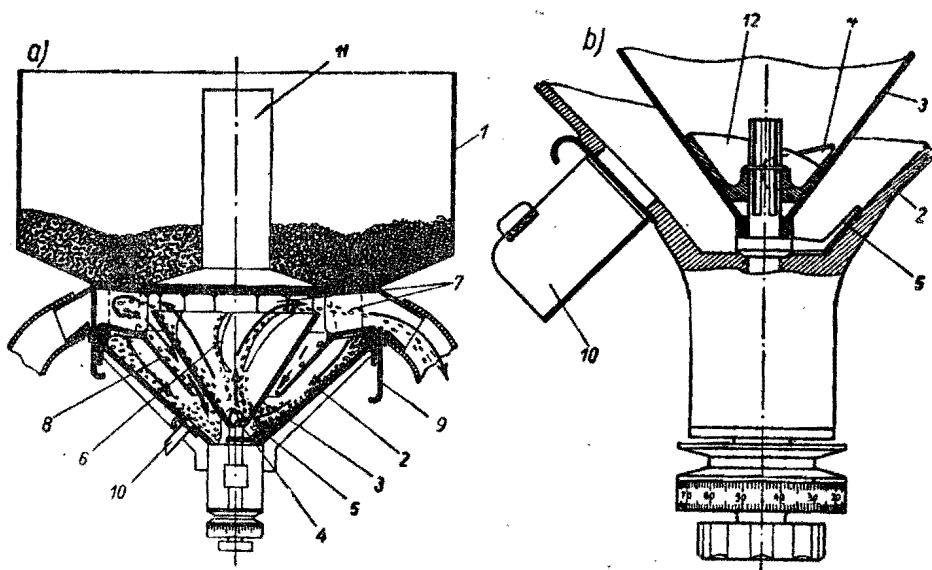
Scheme of operation of feed device with rotary funnel (Stockland's system): a) cross section of the drill; b) detail of control unit: 1—seed hopper; 2—conical shield; 3—funnel-shaped rotor; 4—inlet to the rotor interior; 5—agitator; 6—rotor blades; 7—outlet openings; 8—cone slot; 9—damper; 10—discharge opening for the remaining seeds; 11—airflow outlet tube; 12—adjustable diaphragm of the feeding inlet.
